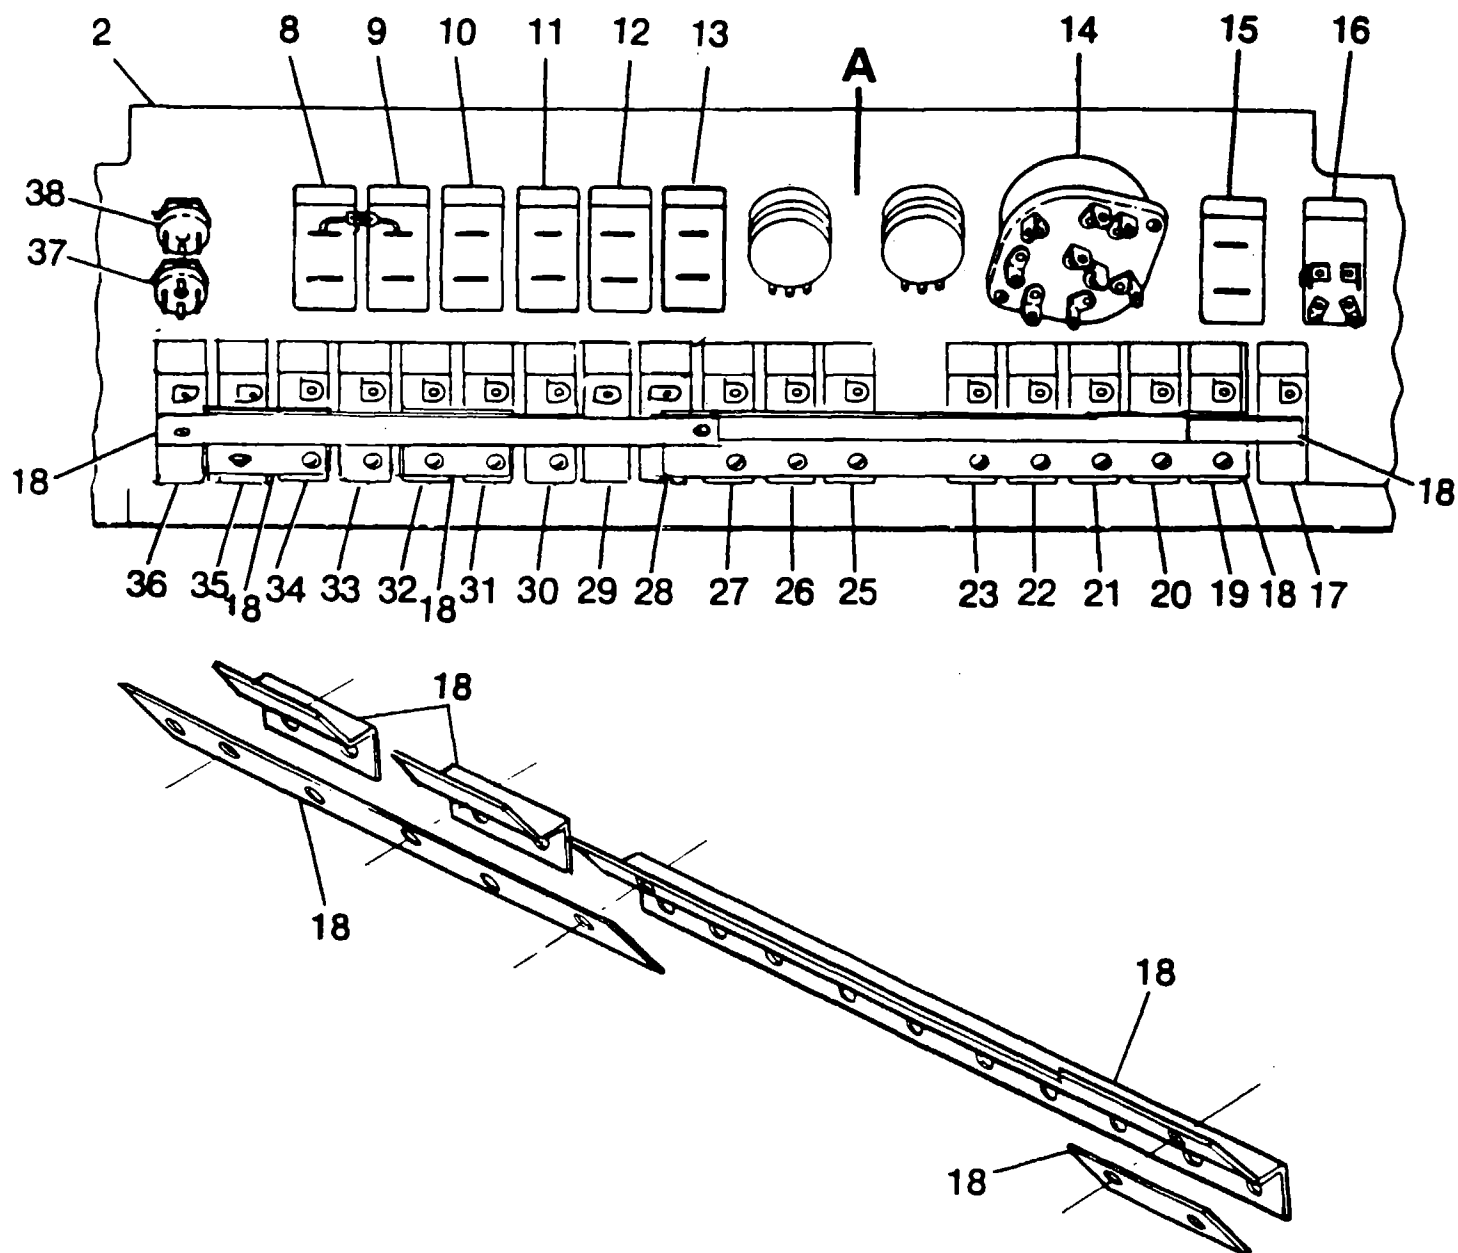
Switch and Circuit Breaker Installation (Sheet 1 of 3)
